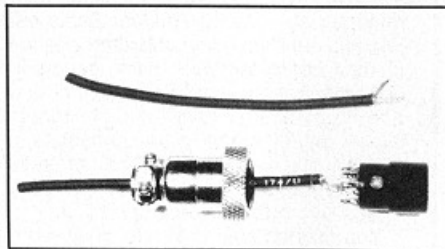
If you can install a DIN plug, you can also handle mike connectors. To keep from losing those tiny strain-relief and plug-retaining screws, temporarily turn them back into their holes after removing the removable strain-relief half and plug. Almost invisible in this picture is the clear plastic tubing that fits inside the shell to avoid pin-to-shell shorts. Be sure you slip it onto the cable—between the shell and cable end—before you begin soldering. If your cable is too skinny to be clamped by the strain relief, build up its diameter with electrical tape.
